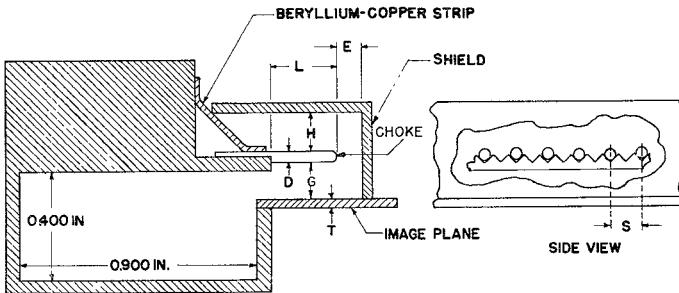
Fixture used to test longitudinal serrated chokes, cross sectional view.
